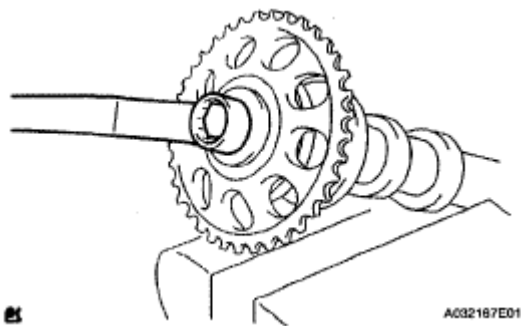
Installing Camshaft Timing Sprocket With Bolt
